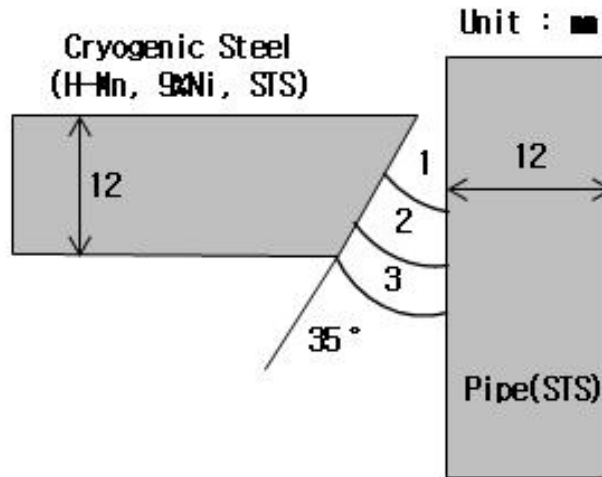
Welding joint configuration and welding sequence
